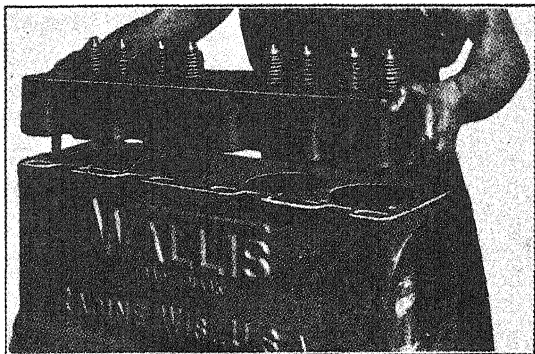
Cylinder head, cylinder-head gasket, and engine block.
